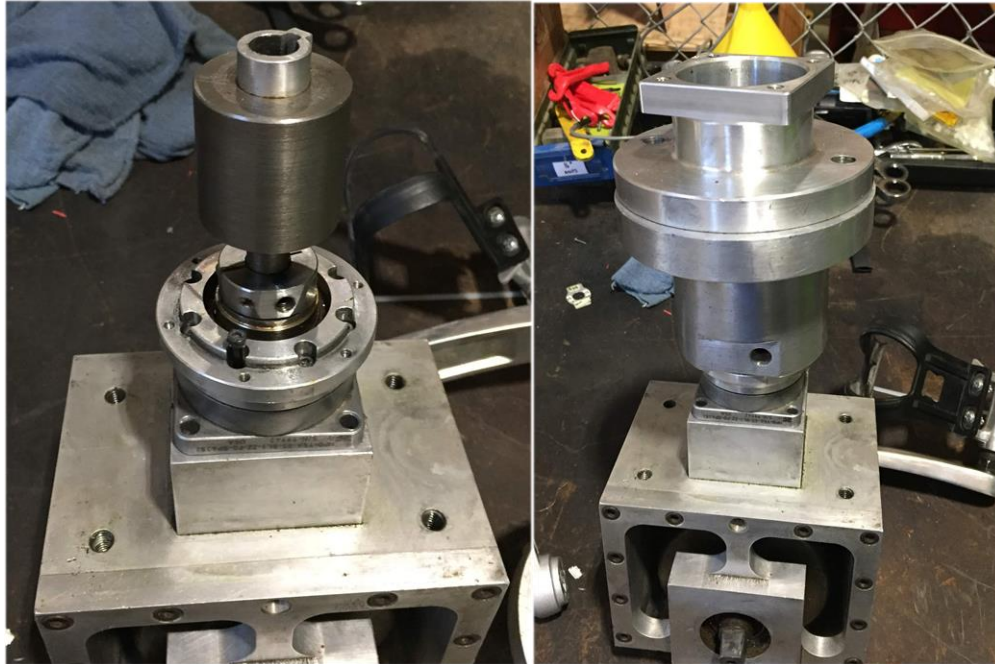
Pictures of the current drivetrain and drivetrain mounting
